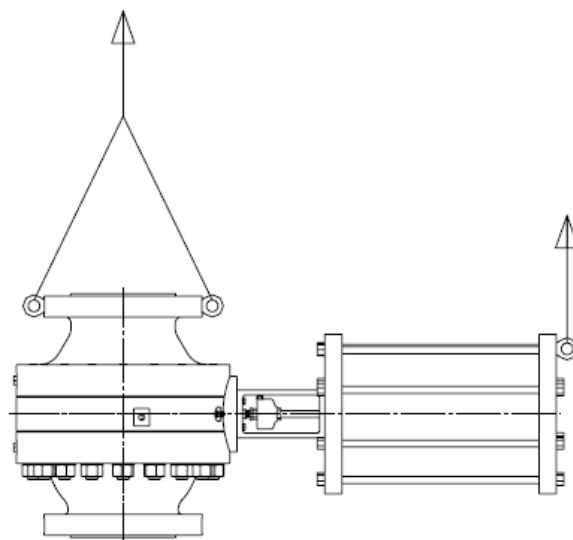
Preferred lifting arrangements when the valve assembly is packed in the Horizontal position.
